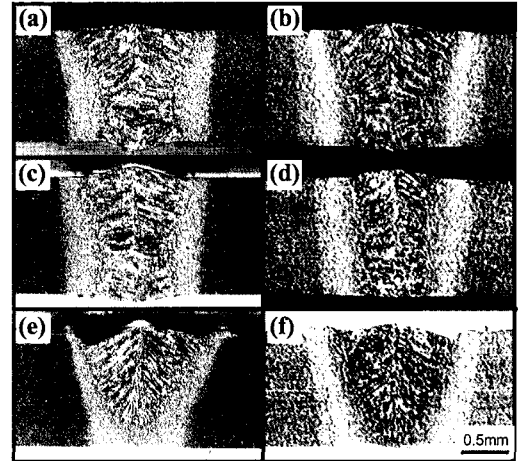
Cross-sections of bead with different welding speed and shield gas.
